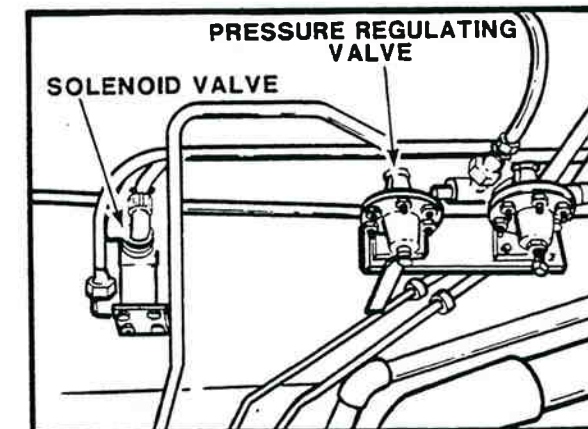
Axle Unload Solenoid Valve and Pressure Regulator.
